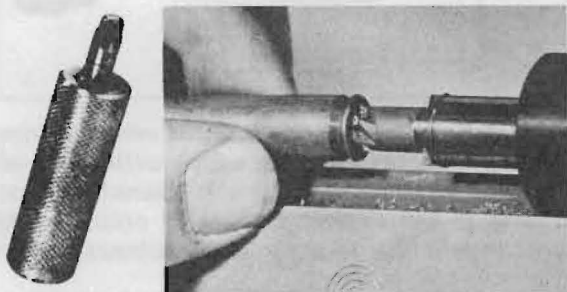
Pocket reamers may be of the simple hand-held type (left) or in the form of an accessory for a lathe-type trimming tool. Shown at right is the pocket reamer used with the versatile Forster case trimmer.
